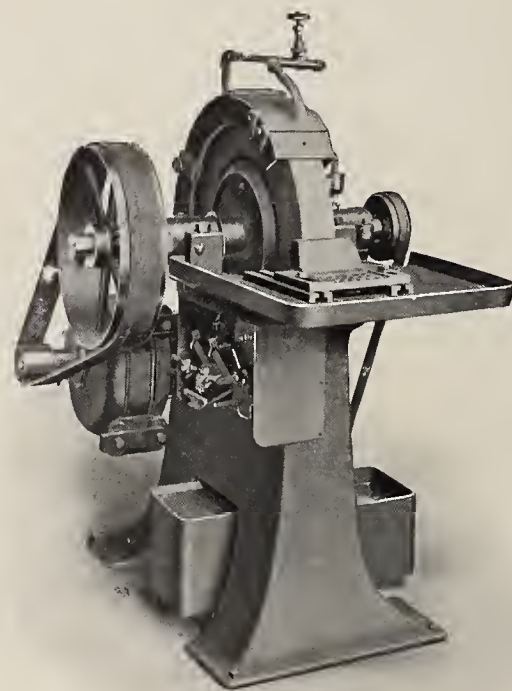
A 30-INCH SPRINGFIELD TOOL GRINDER, DRIVEN BY A 2-H. P. GENERAL ELECTRIC MOTOR. SEE PAGE 241
